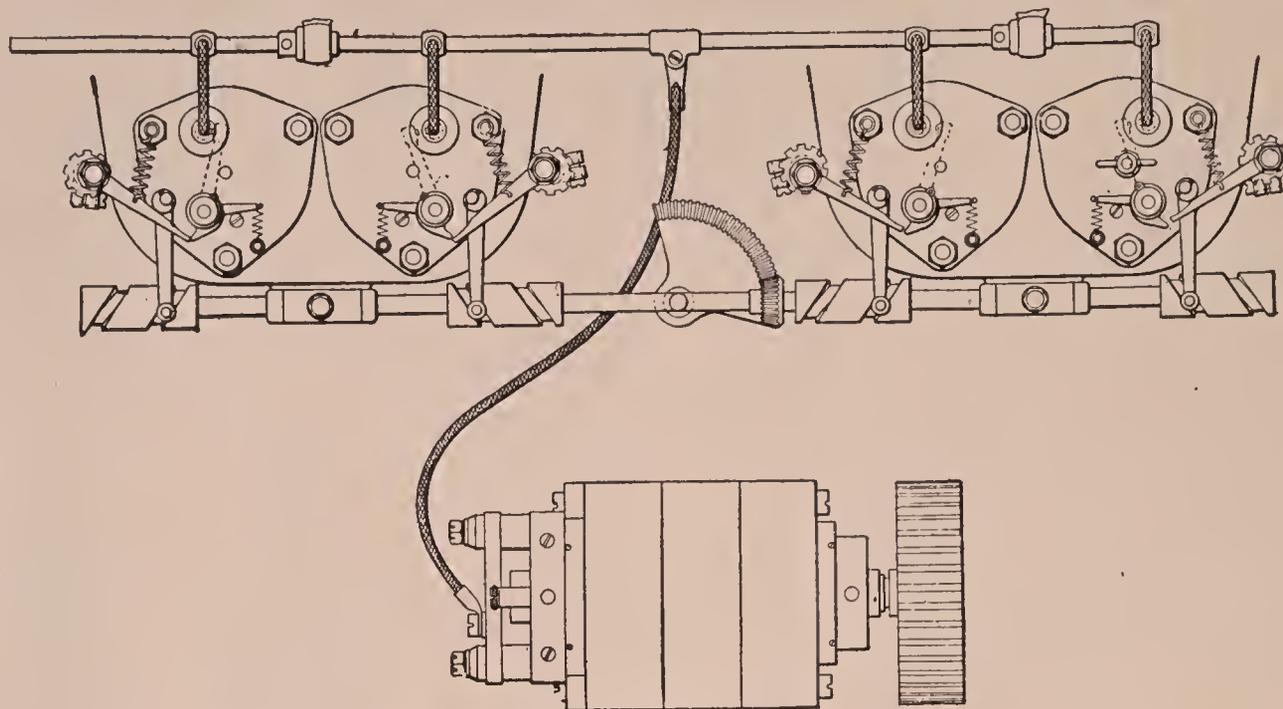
A low tension system of ignition formerly used on Studebaker cars.
